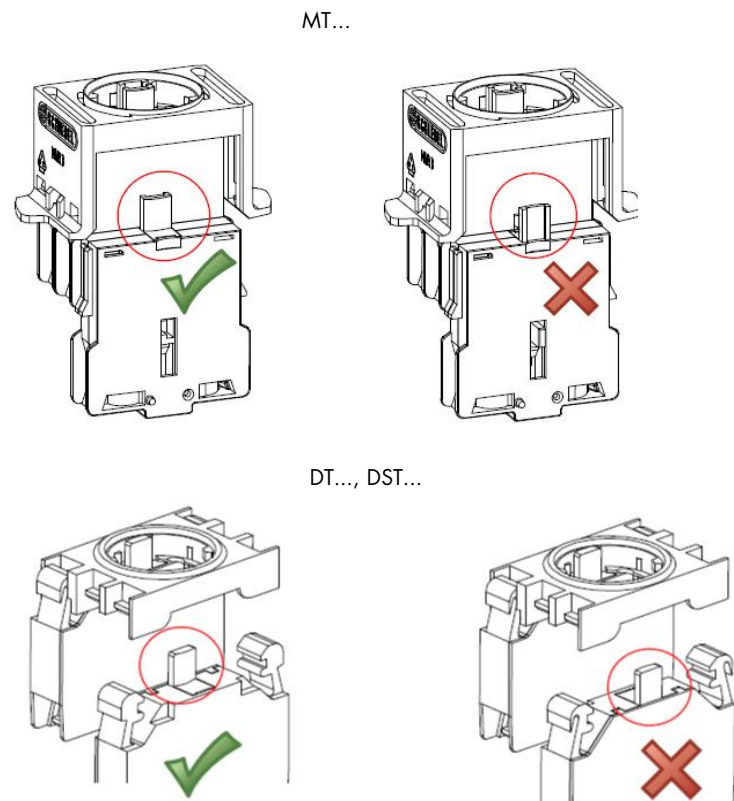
Correct assembly of the modular contact blocks MT..., DT..., DST...
